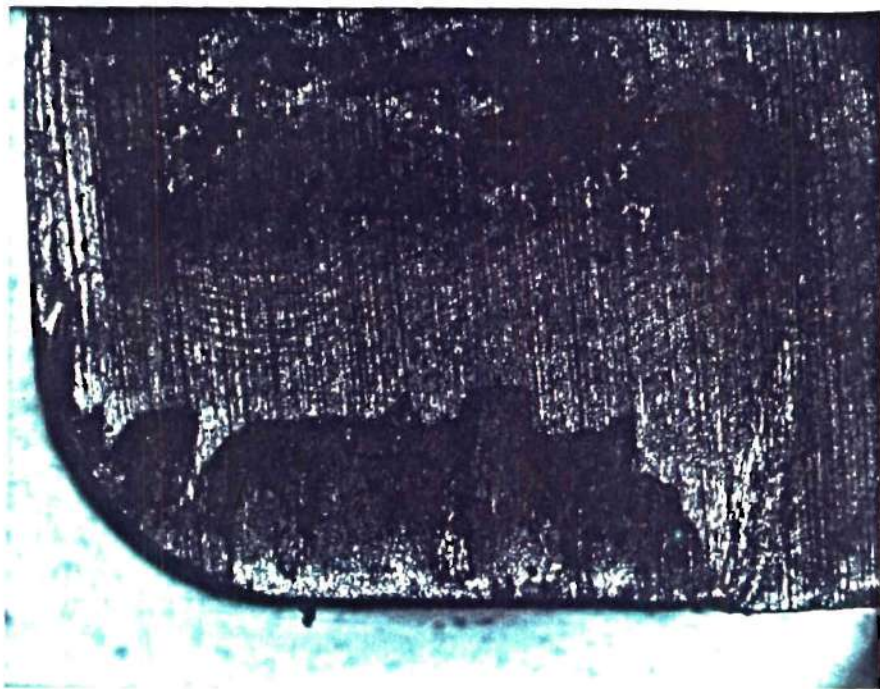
Wear of a Coated Tungsten Carbide Tool, S4, Machined for 7 Minutes, 21 Seconds at a Surface Speed of 150.9 Meters per Minute
